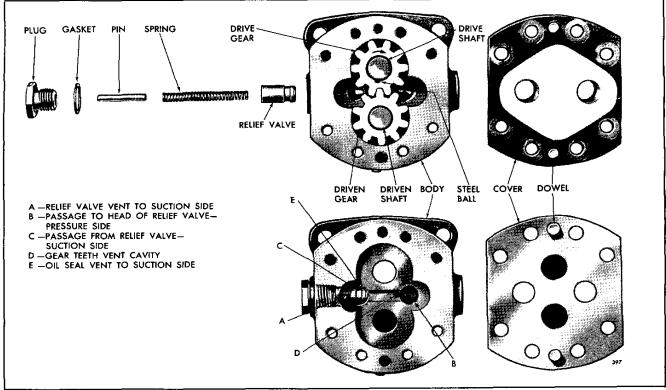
Fuel Pump Valving and Rotation (Right Hand Pump Shown)
